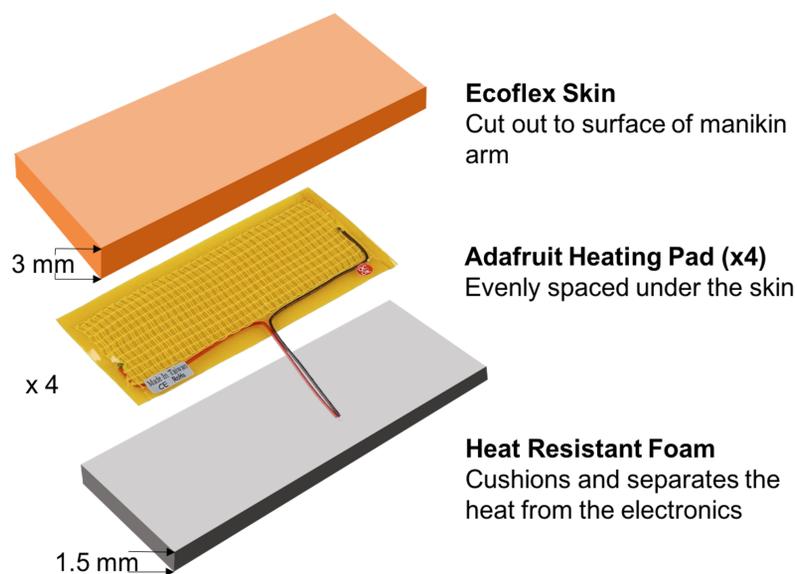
Exploded View of Temperature-Controlled Prosthetic Skin
